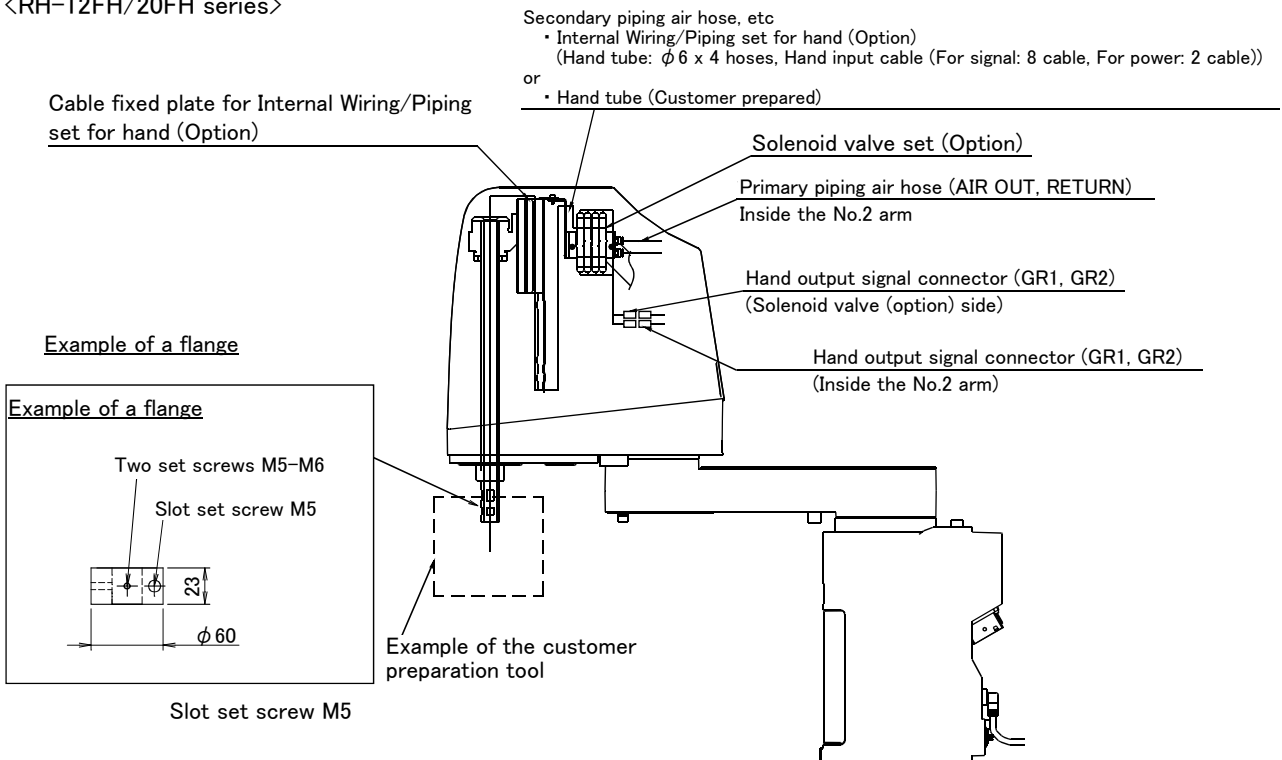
Example of wiring and piping <1> (RH-12FH/20FH series)
